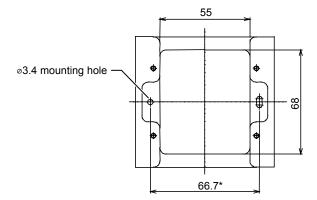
Mounting dimensions (mm): Neostat (not covered) with Multi-Thermocase mounting kit
